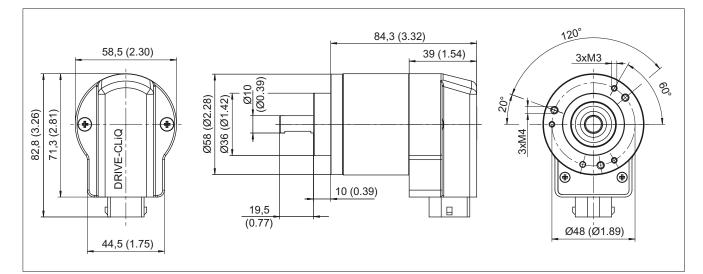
Dimension drawing of clamping flange, all data in mm and (inches)
